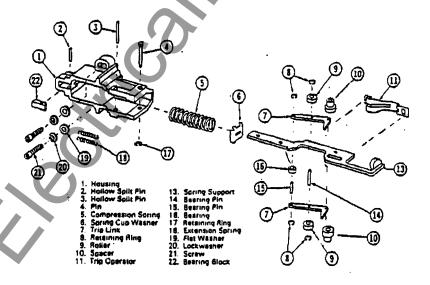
Arc Tip Latch Assembly, Exploded View
